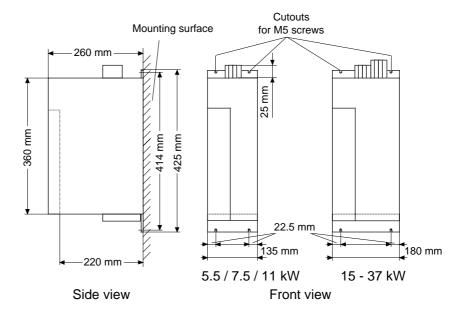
Dimension drawings for housings 135 mm and 180 mm wide
